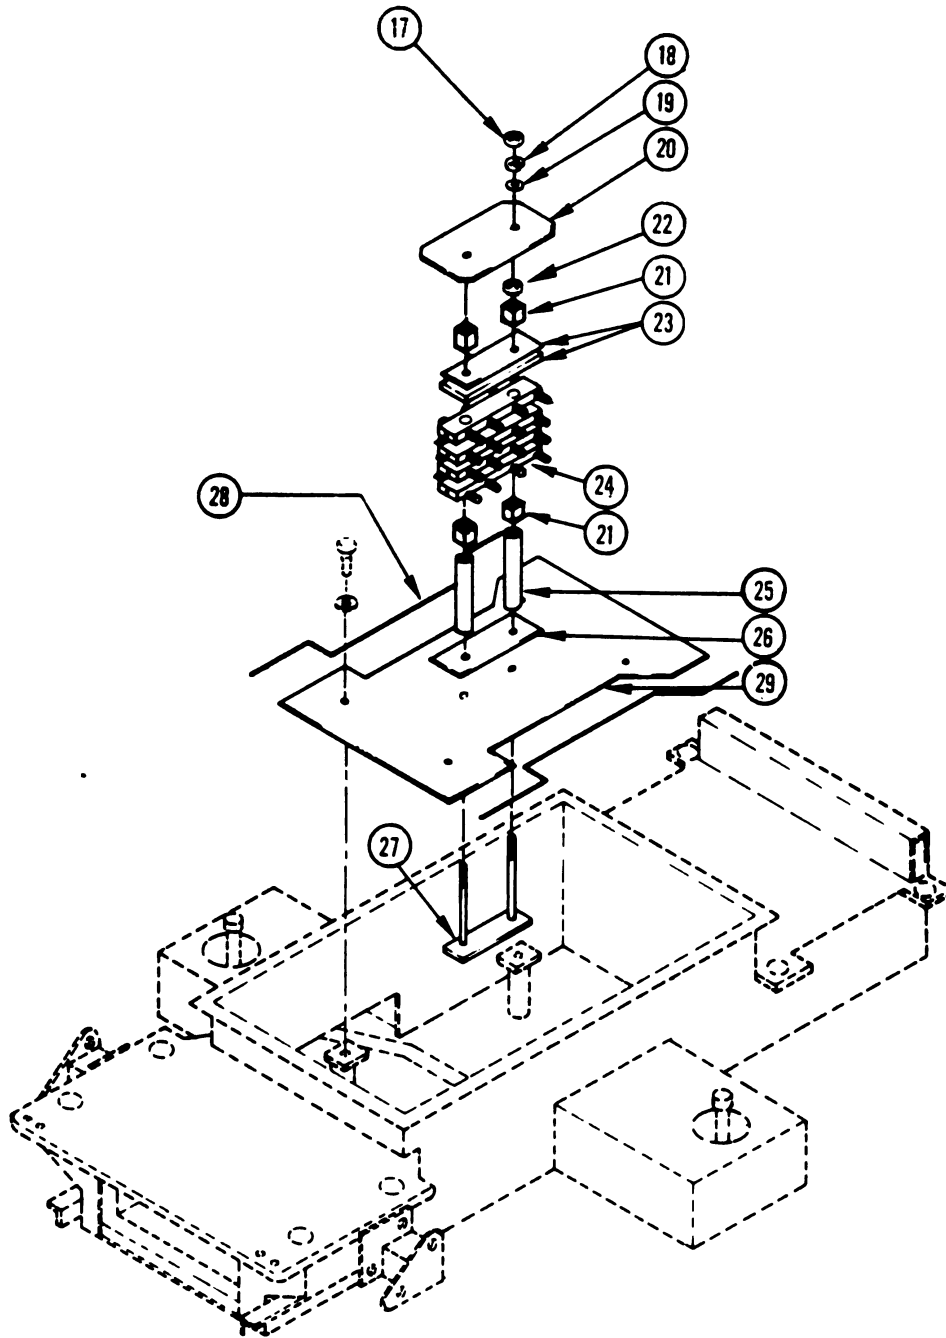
Chassis Assembly (Sheet 3 of 3).
